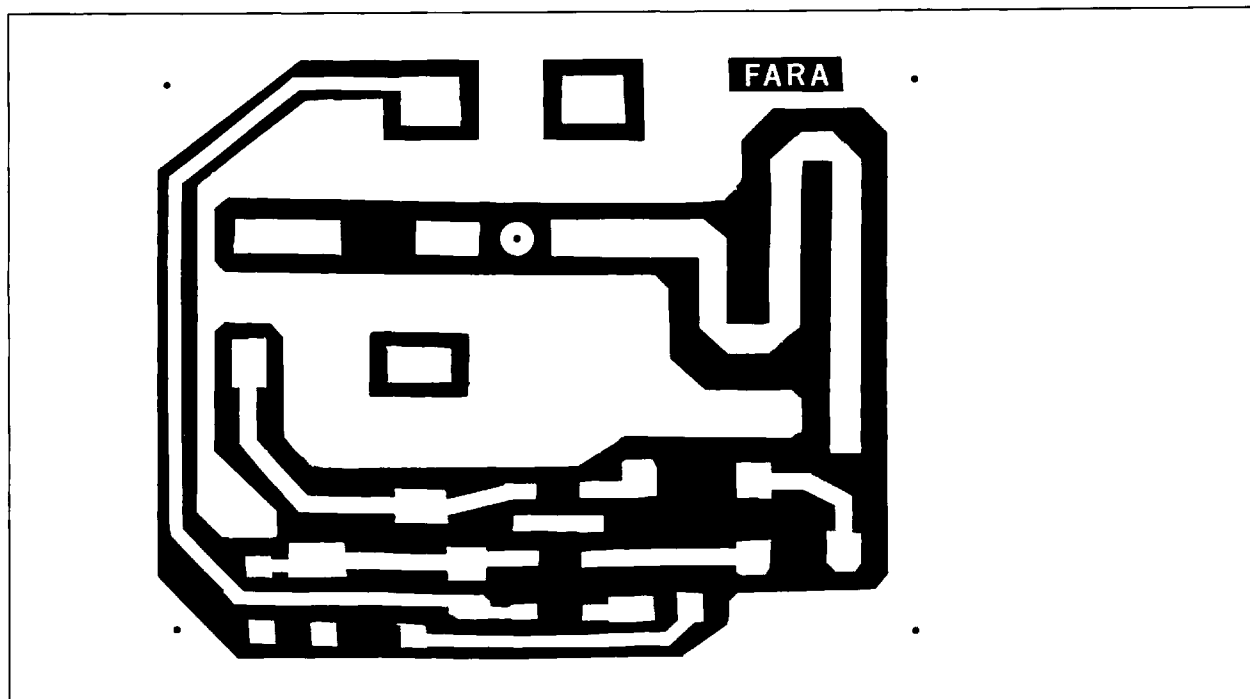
Printed circuit foil pattern (component side). Metal is shown in white, black areas are the etched surfaces.
